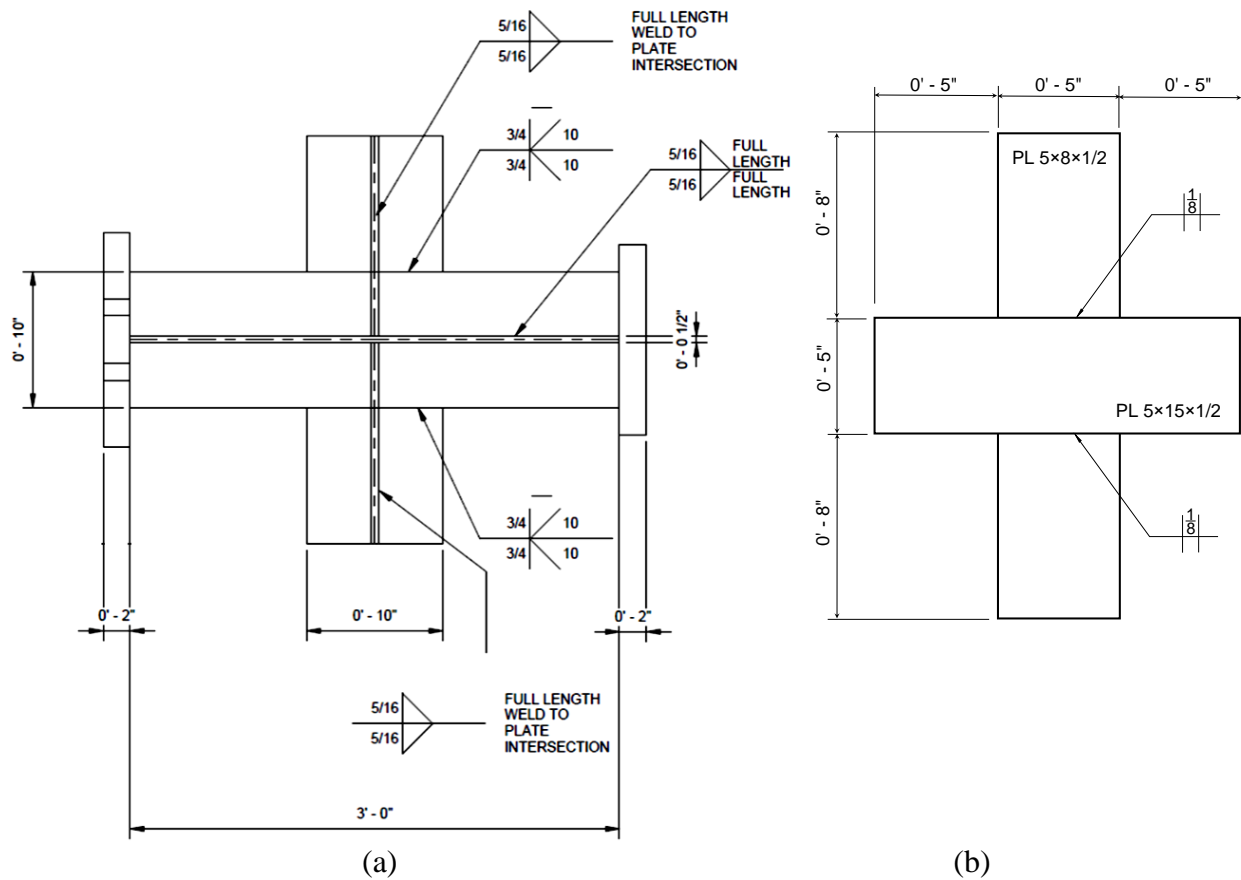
Gate section F13 fabrication details for (a) full-scale specimen and (b) half-scale specimen
